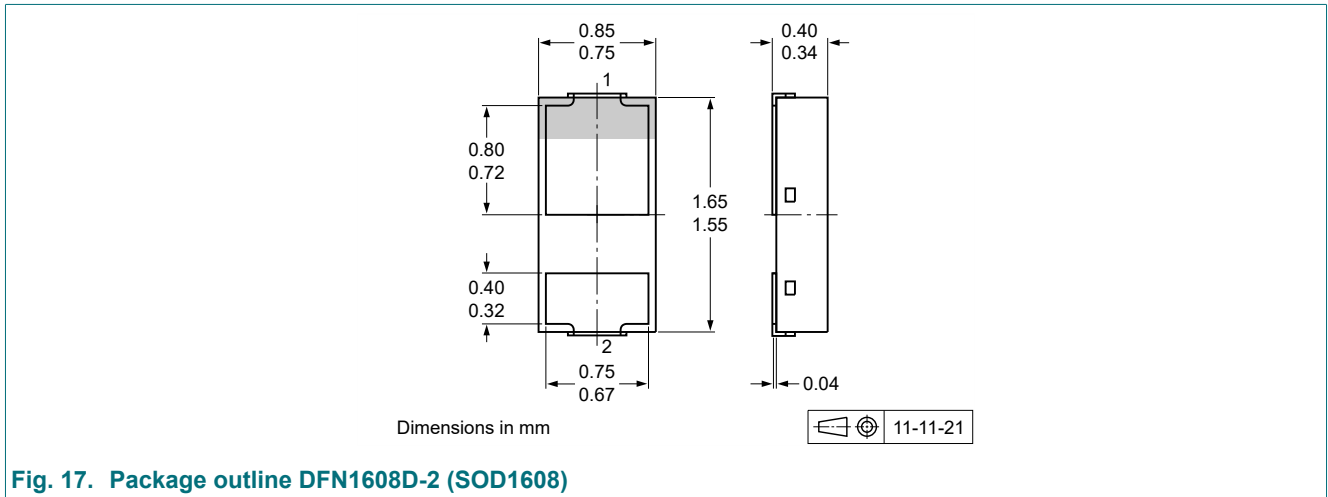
Package outline DFN1608D-2 (SOD1608)
